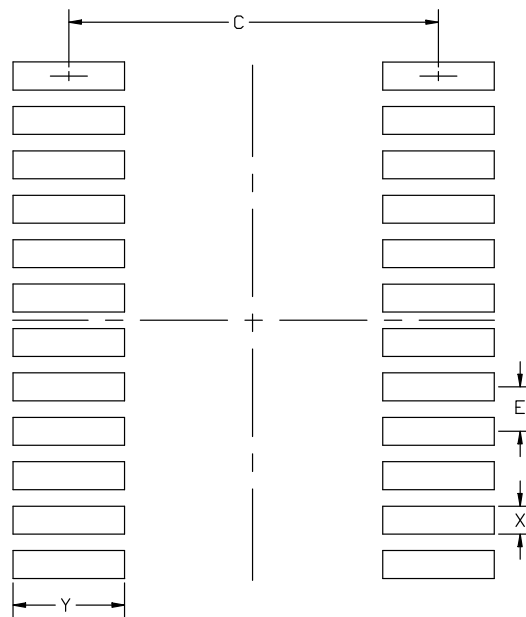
QSOP24 PCB Land Pattern Drawing
